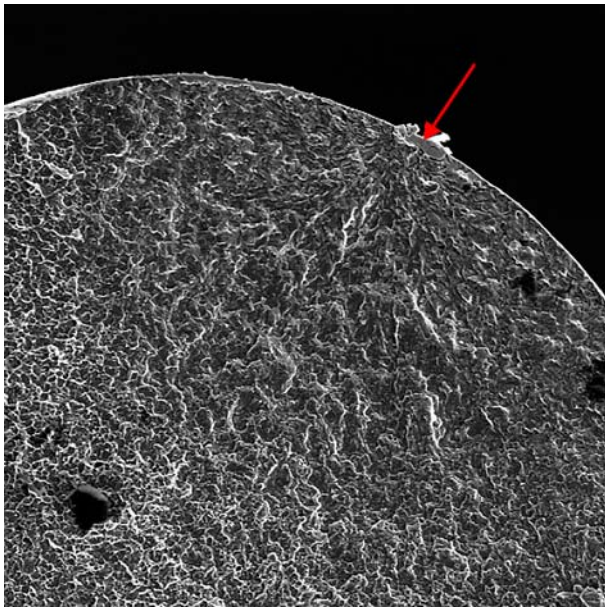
SEM image of fatigue fracture surface 0.024" diameter wire
